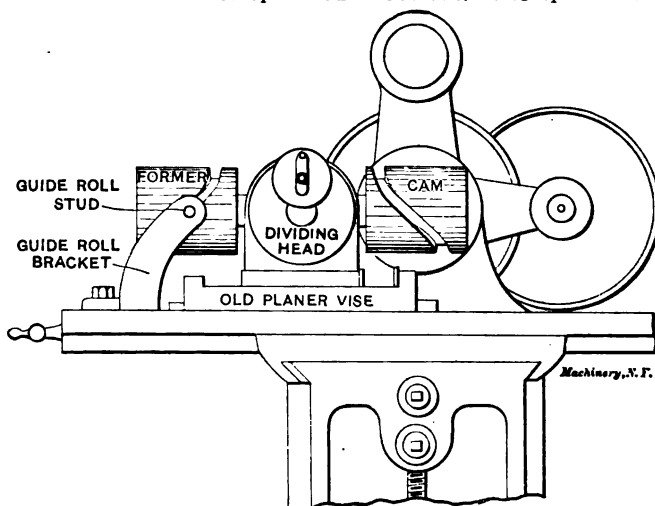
Cutting a Cylindrical Cam with the Rig shown in Fig. 33.
